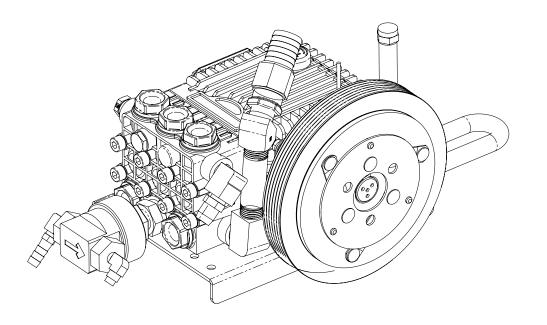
Assembly, Pump - CDS xDrive 601-007-705 Rev. C
